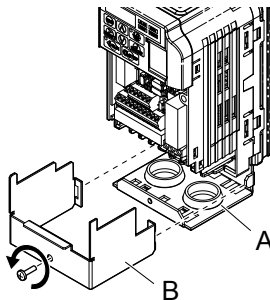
Remove the Terminal Cover on a NEMA Type 1 Drive
